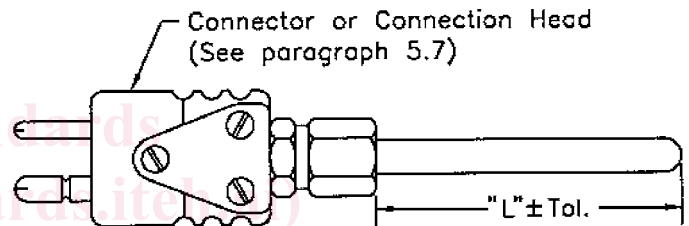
Sheathed Thermocouple Assembly with Connector or Connection Head (any Type Specified)
